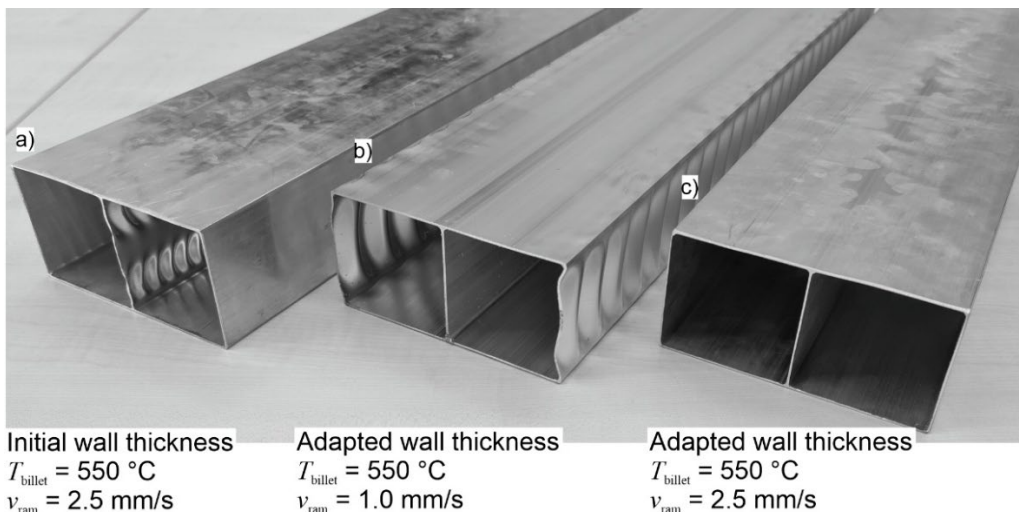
Extruded profiles showing different defects: a) wrinkling on the center web before wall thickness adjustment, b) wrinkling of the profile side walls after adjustment c) defect-free profile after wall thickness adjustment.
